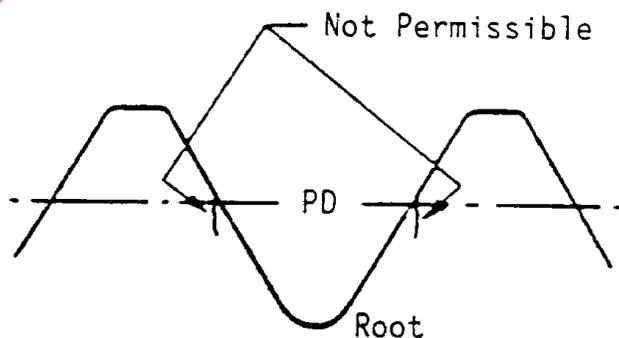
LAPS BELOW PD EXTENDING TOWARD ROOT, ROLLED THREAD
